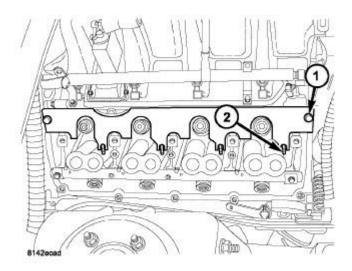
PUSHROD RETAINING PLATE Courtesy of CHRYSLER LLC
